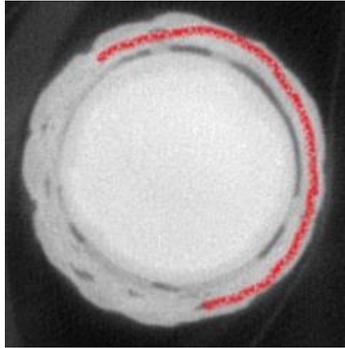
XCT analysis of GACE 2 showing location of tube fracture (red line)
